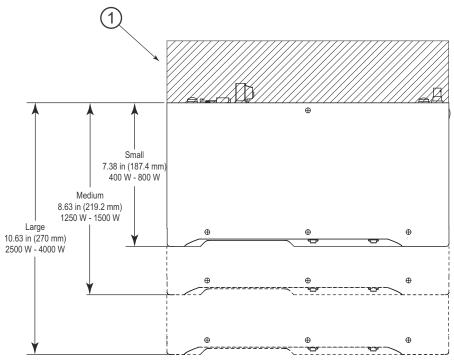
DCX F EIP Power Supply Benchtop Dimensional Drawing.
